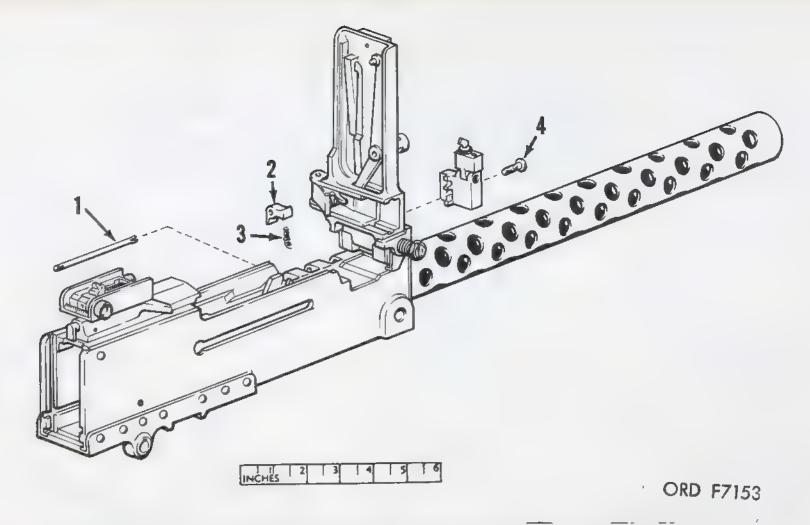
Casing and barrel jacket group for machine gun M1919A4.
